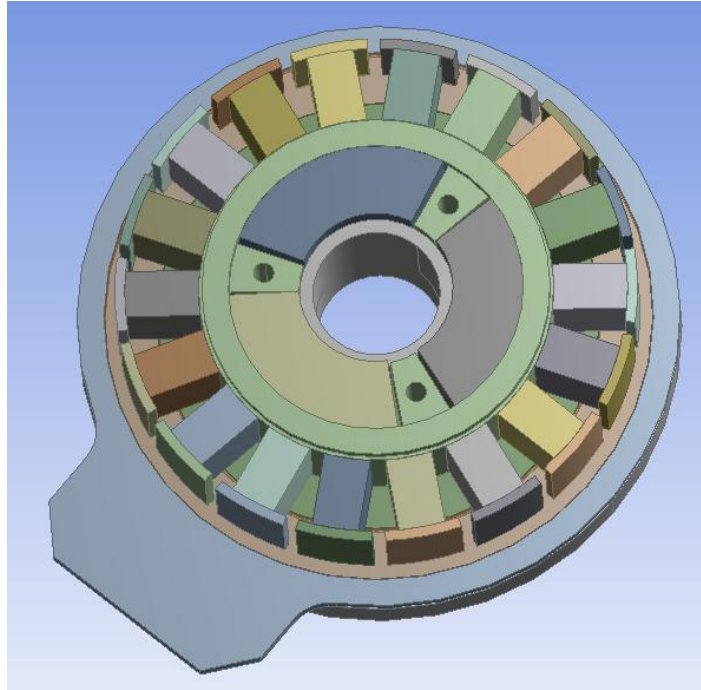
CAD Model of Motor with Gap Pad and Aluminum Contacts
